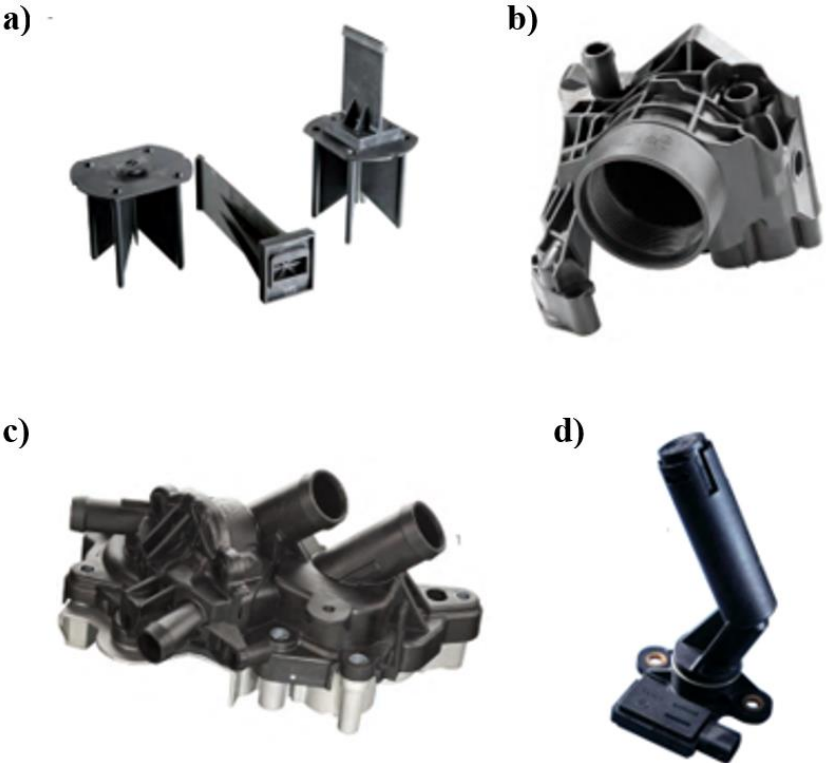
Automobile components made of SFRP. a) thermal dowel, b) oil filter module, c) thermostat housing, d) oil sensor [3]
